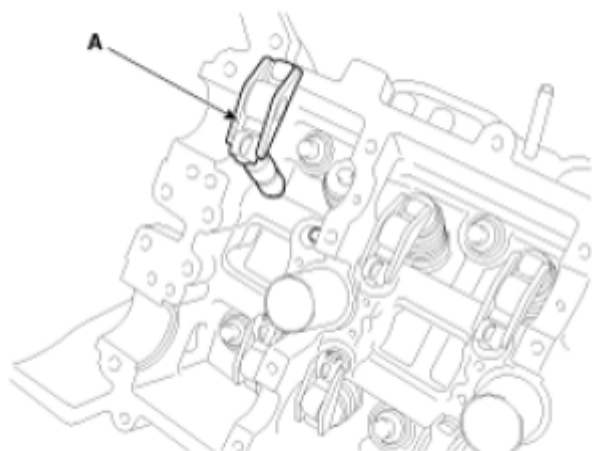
Identifying Roller Finger Follower And Hydraulic Lash Adjuster Assembly
